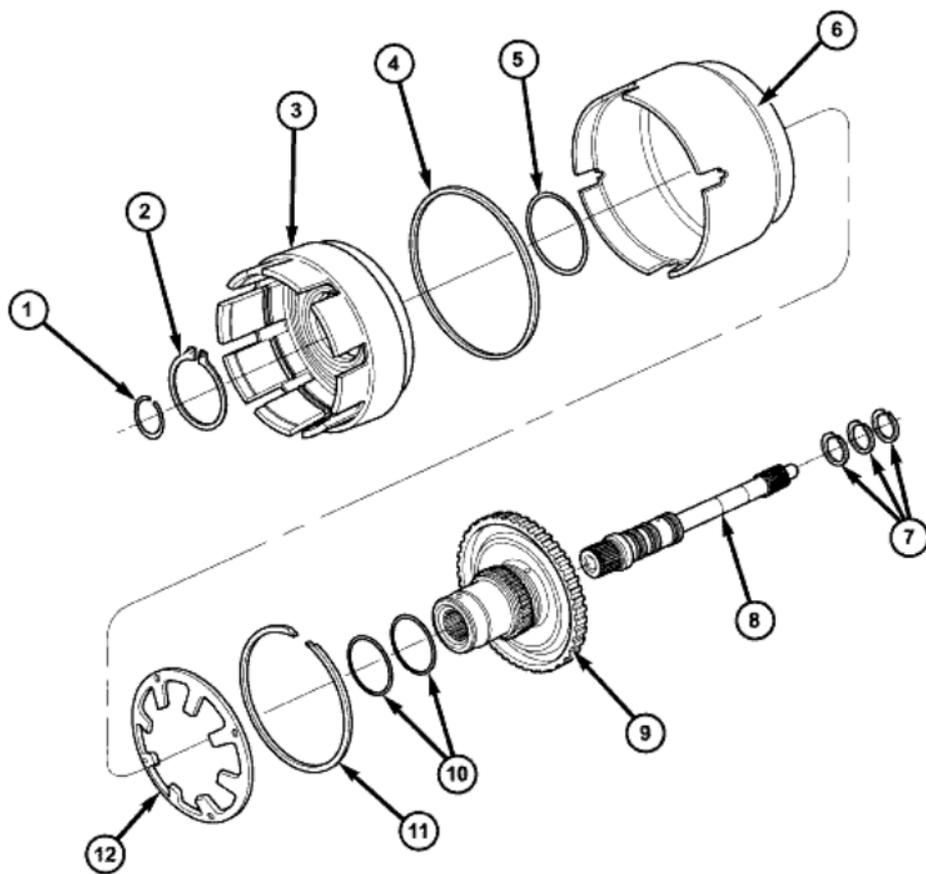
Identifying Input Clutch Hub, Retainer, & OD/Reverse Piston
